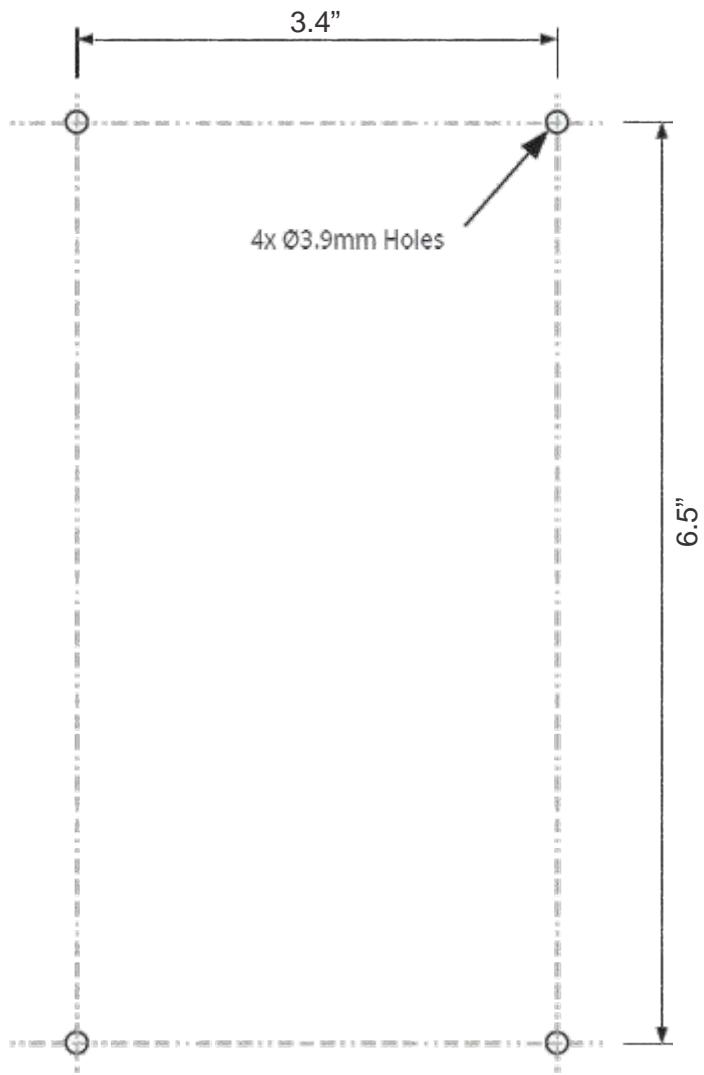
Mounting Dimensions for the SafeCable DLM-Z2
